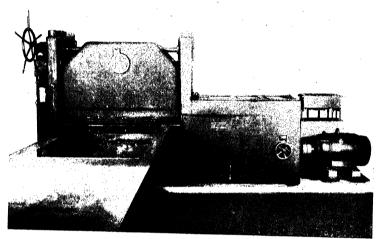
Plate-straightening machine with reversible drive by three-phase, slipring motor and contactor control.
